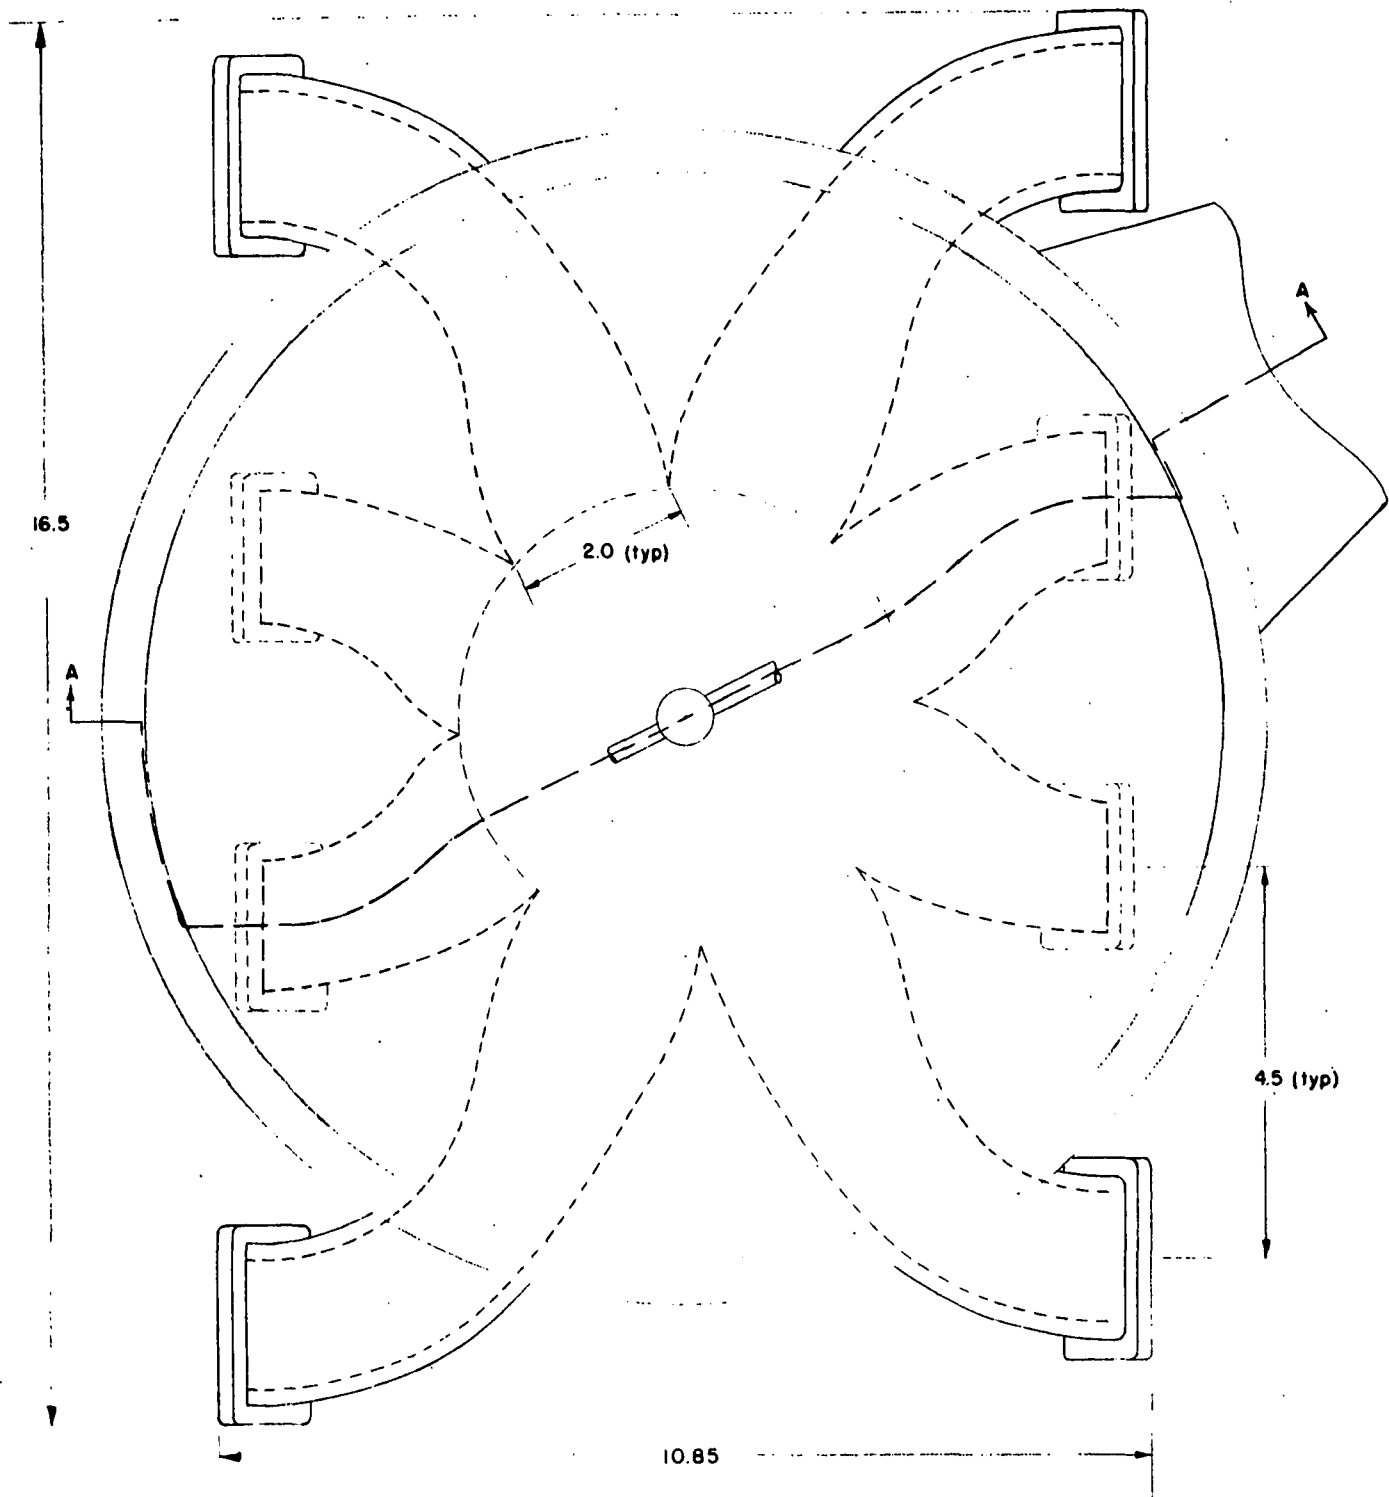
SKETCH LAYOUT OF PROTOTYPE IMPROVED INDUCTION SYSTEM-PLAN VIEW
